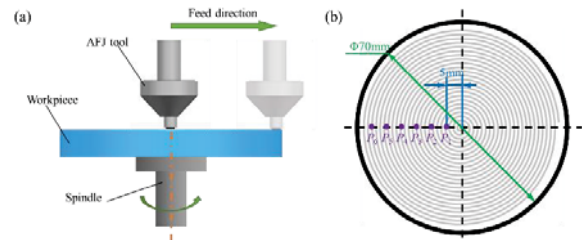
(a) AFJ tool moving and (b) measurement spots on the surface.
